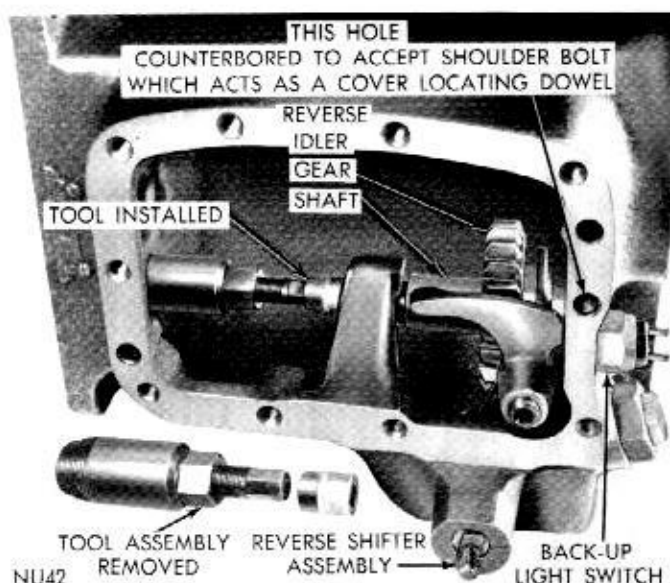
Removing Reverse Idler Gear Shaft (A-833)
